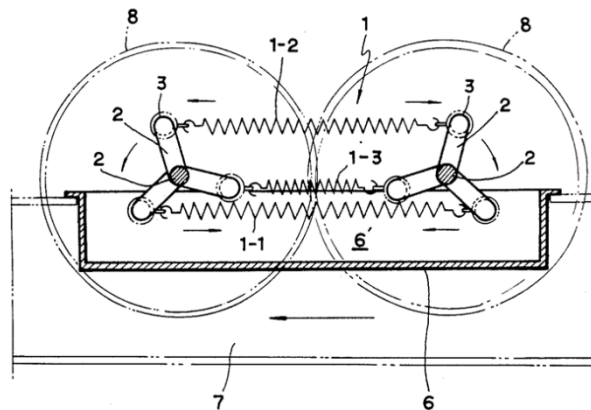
Schematic side view of the TWIN-CRANK TYPE HEAT ENGINE by Myung, et al. [6]: Components: Power elements (SMA) formed into tightly (1), two crank shafts (2), sliding bearings (3), hot water vessel (6), hot water passage (7), crank shaft (8).
